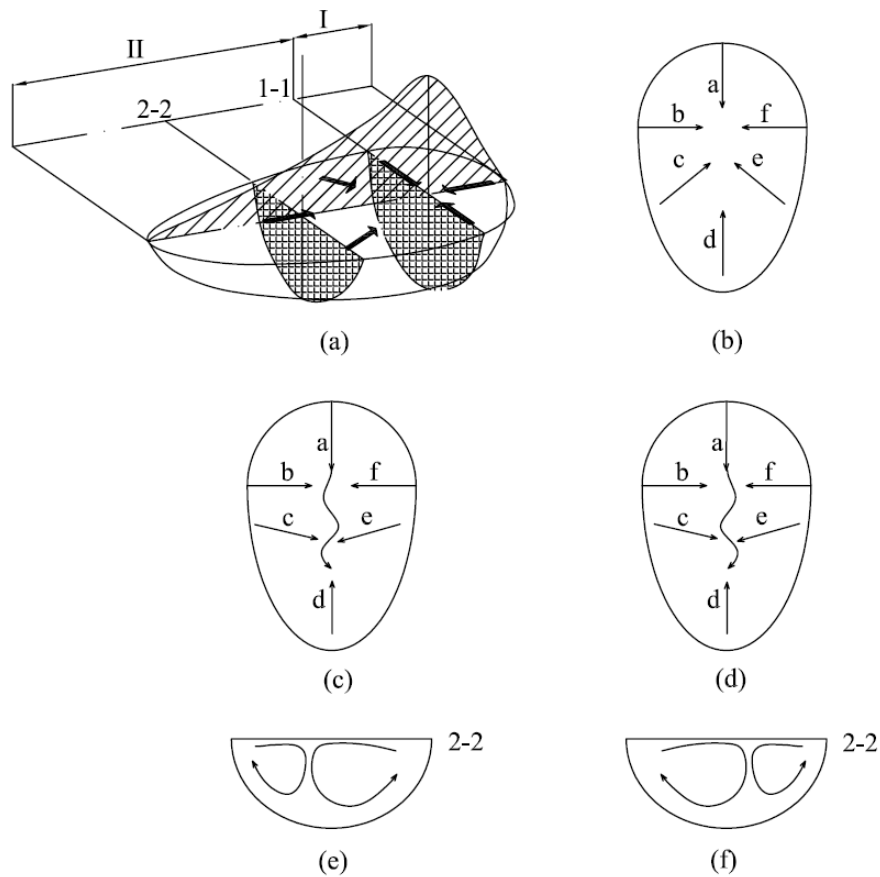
Weld pool surface shape (a) 3D shape of the weld pool (b) symmetrical flow motion on the weld pool surface, (c) and (d) illustration of observed flow motion captured from high speed camera images, (e) and (f) asymmetry inward flow inside the weld pool from cross section view.
